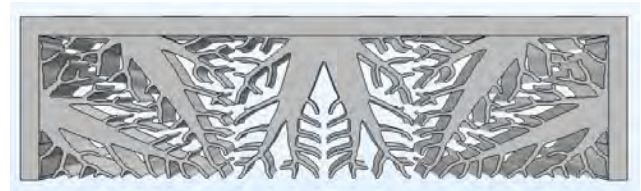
RIGHT SIDE VIEW OF THE ASSEMBLED 3D HEAT SINK DESIGN FOR THE IPS
